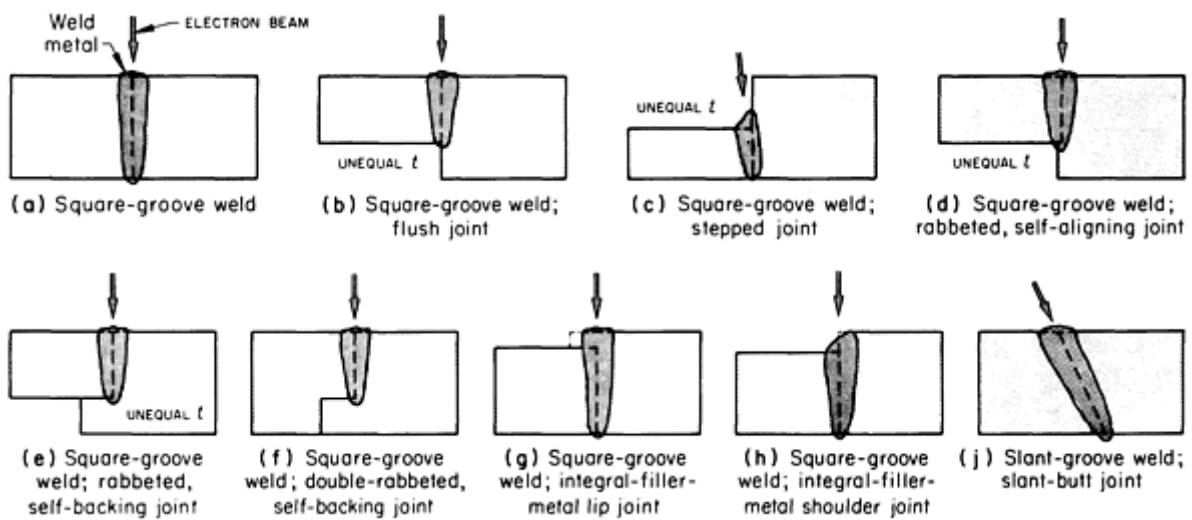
TYPES OF BUTT JOINTS AND WELDS TYPICALLY GENERATED BY EBW
